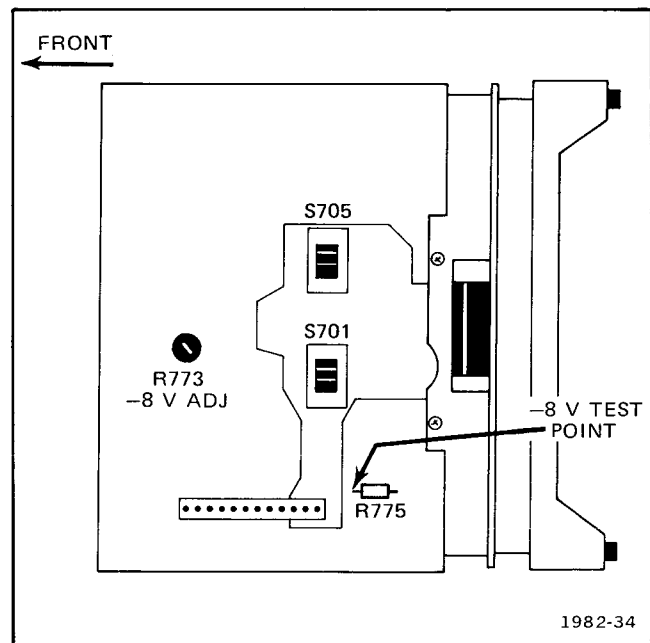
Power supply adjustment locations (on bottom of chassis).
